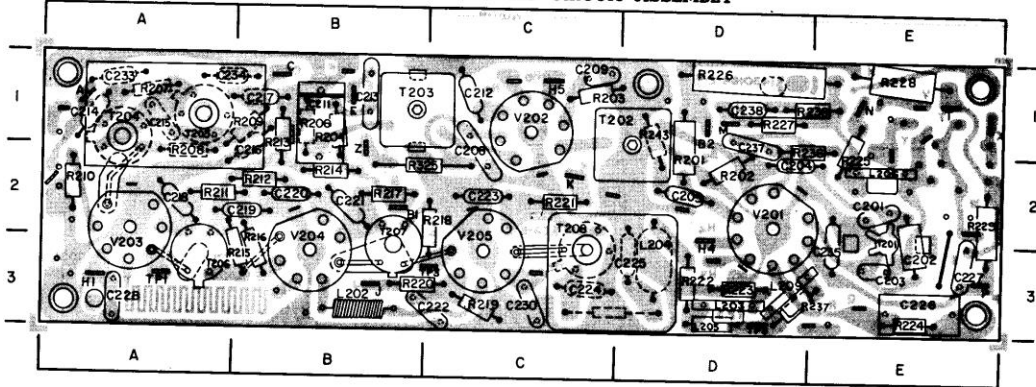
PW200 Sealed Circuit I-F and Video Assembly Composite Diagram
